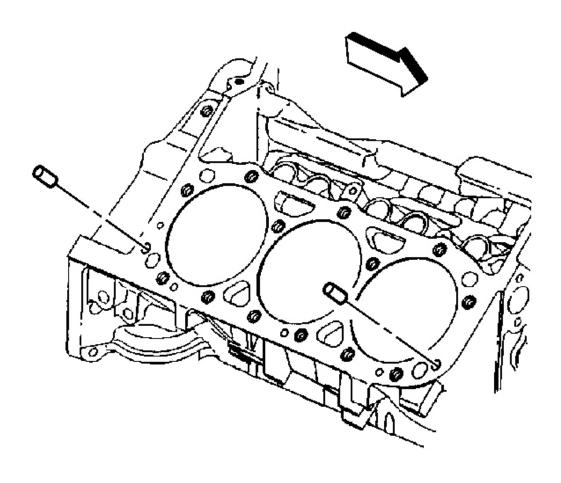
Cylinder Head Locator Pins Courtesy of GENERAL MOTORS CORP.
